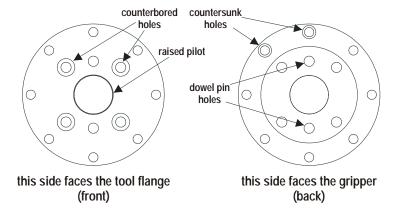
Gripper adapter flange for A465 and F3 robot systems
